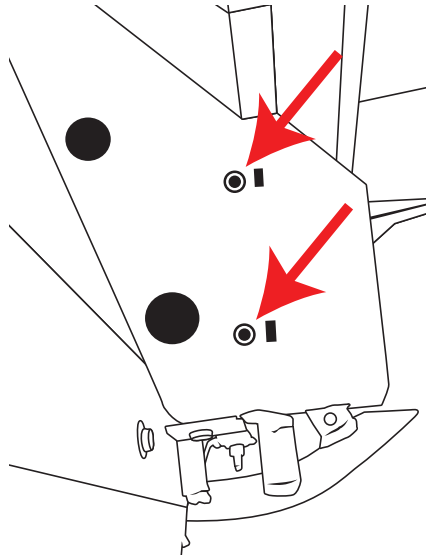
Remove the (4) Push-Pins Securing the Radiator Shroud to the Bumper Cover
